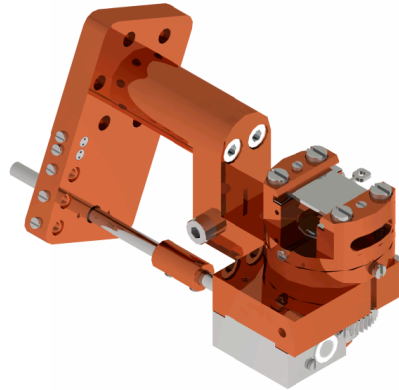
Rendered computer model of the assembled sample stage. The sample is mounted on the plate with the protruding handle.
